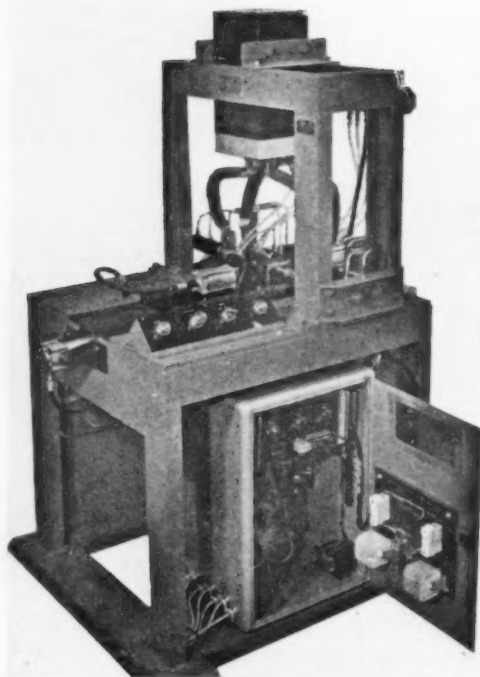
A general view of the television chassis-tuner unit welding machine, recently manufactured for Ferguson Radio Corporation by Electro-Mechan-Heat Ltd., of Manor Works, Bilston, Staffordshire. The electronic control cubicle, whose door is open, clearly illustrates the ease of servicing. Beneath the transformer mounting can be seen the television tuner chassis in position. The air cylinder on the extreme left hand side is used to index the work table from the loading to the welding position. The other air cylinder attached to the work jig is one of the two clamping air cylinders
